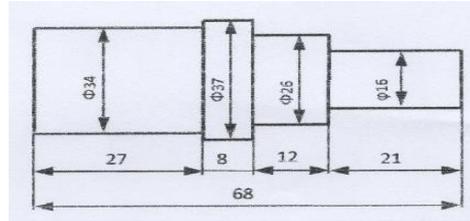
Workpieces of multilevel turning practice (dimensions in mm).
